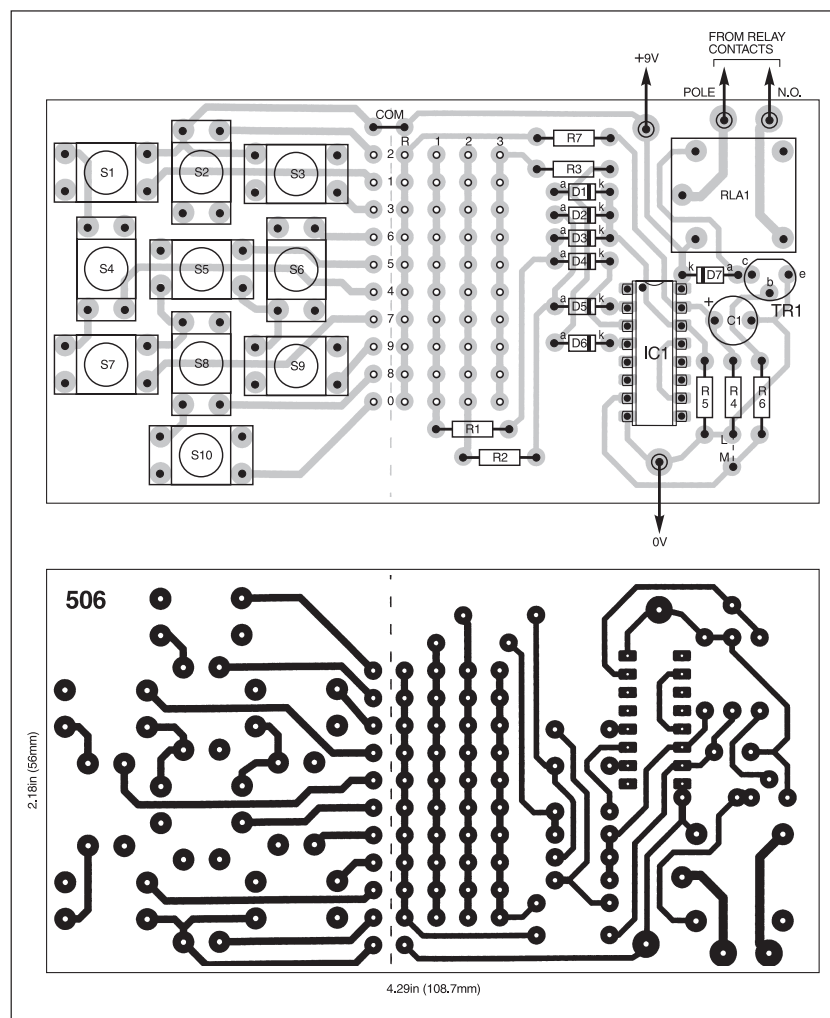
Component and track layout details for the Digital Lock printed circuit board
